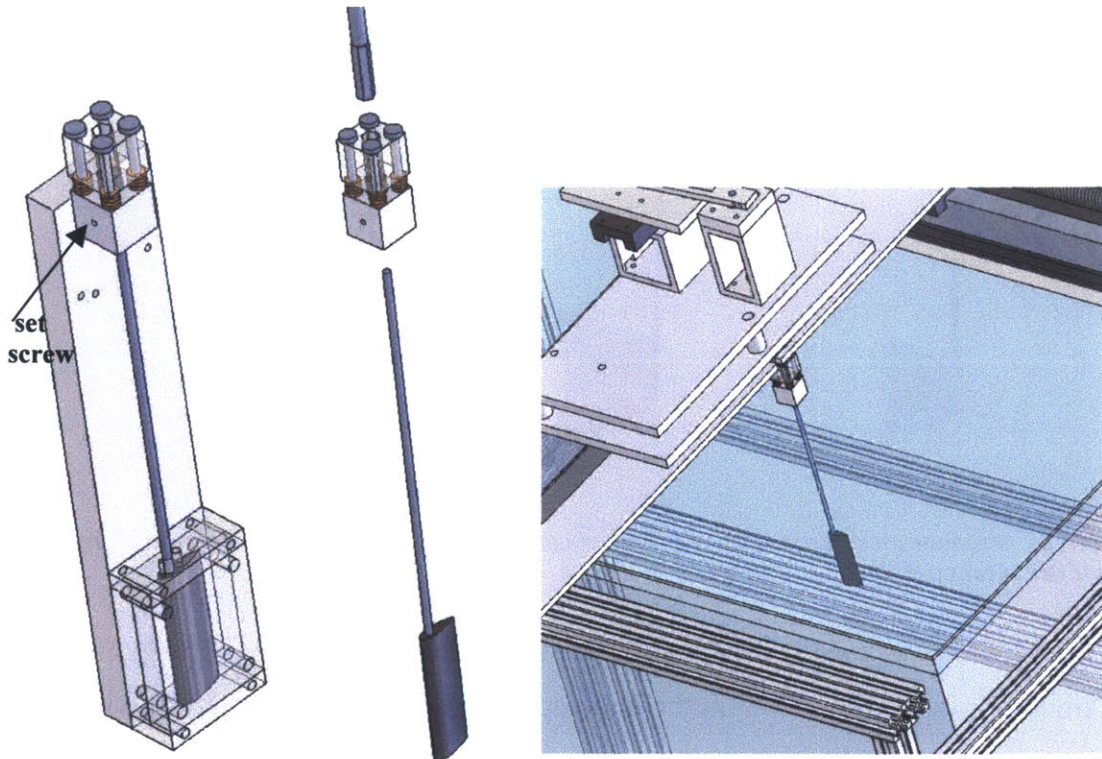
Magnetic alignment mechanism. The image on the left shows how the foil is aligned to the mechanism using the pre-existing molds. The center image shows a broken out assembly. The right image shows the magnetic alignment mechanism in the context of the rest of the apparatus.
